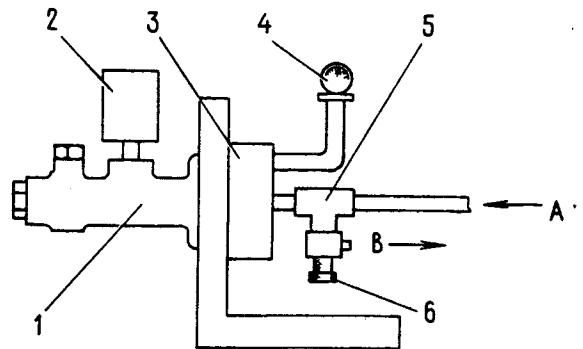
Checking Rear Sealing Ring for Tightness:
